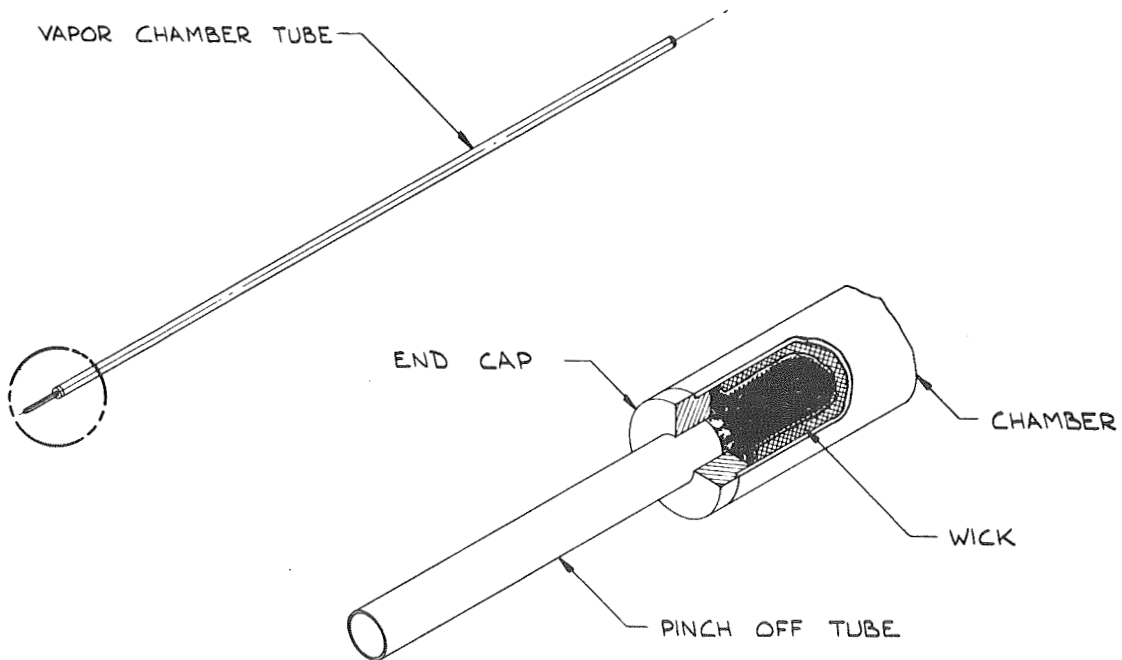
Vapor Chamber Fin Radiator Assembly Sequence Step 4
